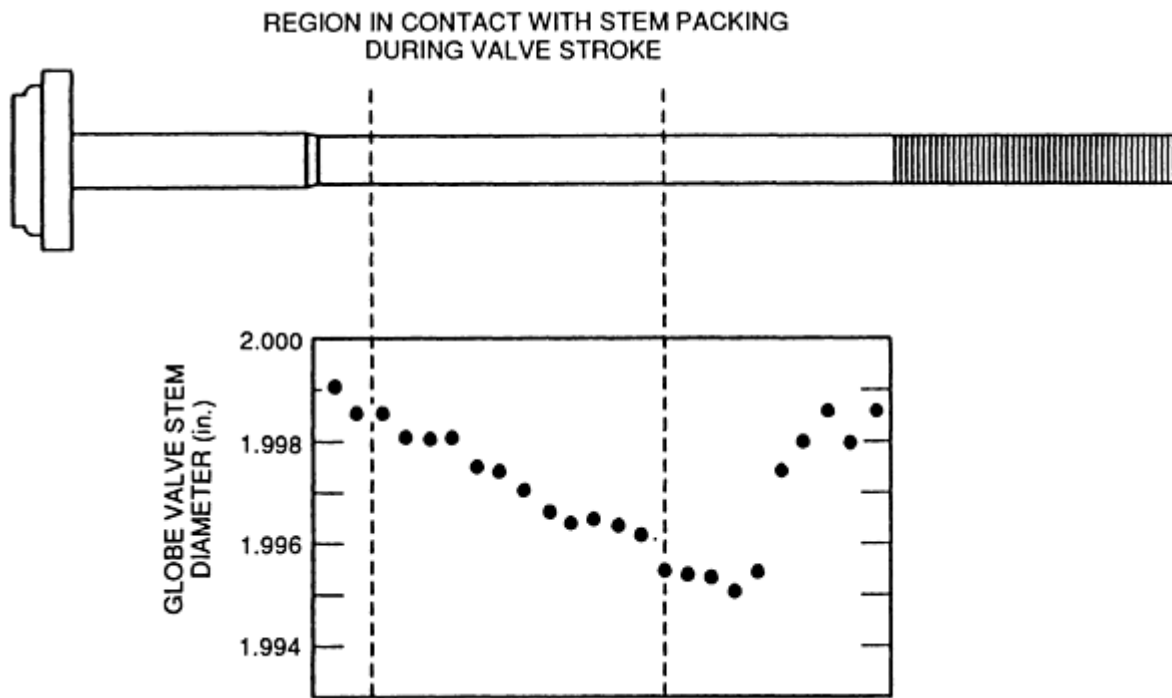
Tapered valve stem of 150 mm (6 in.) globe valve illustrated in Fig. 9
